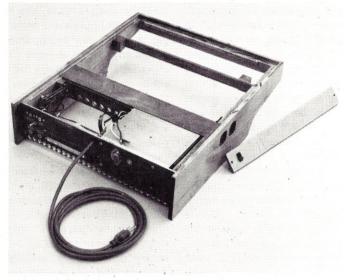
View of the bottom of the case with the bottom panel removed. The crosspieces arranged both horizontally and vertically give the framework rigidity. The bottom panel fits flush into the rabbeted edges. The small circuit board fastened to the left side board is the rf modulator, which permits video output to a normal TV set. (All photographs by Tom Gilmore and Gilbert Montoya)
